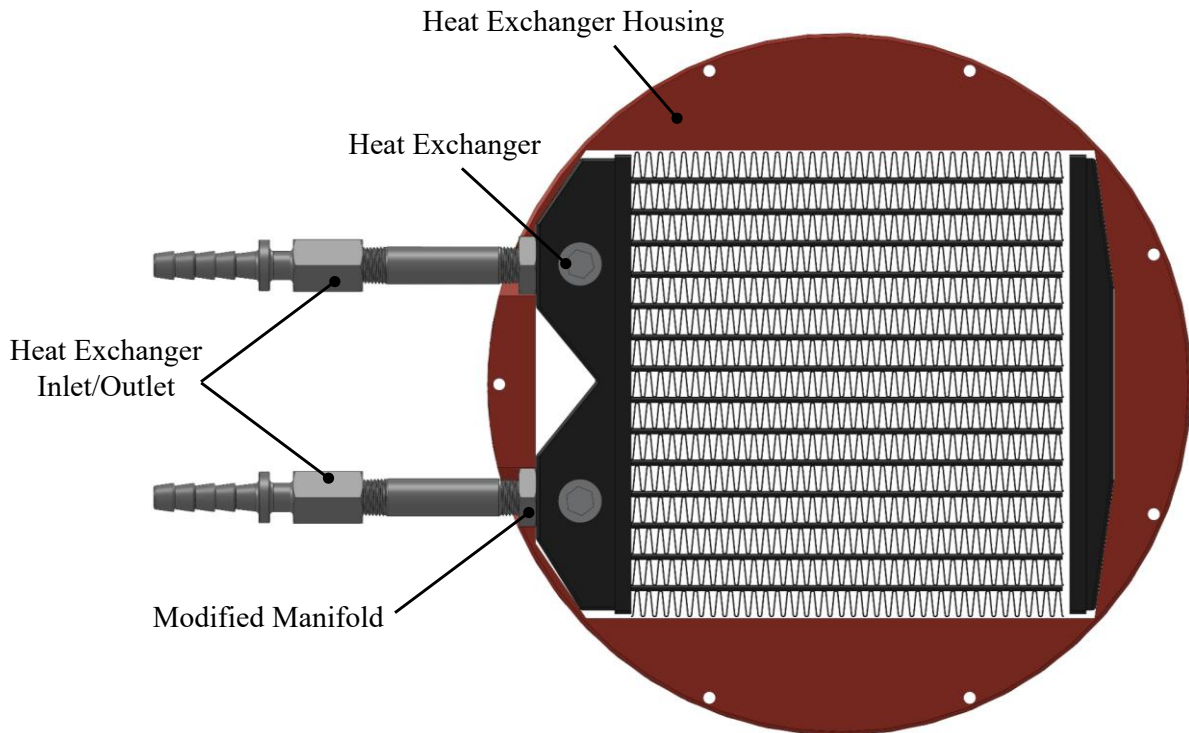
Solid Model of Heat Exchanger Assembly and Housing
